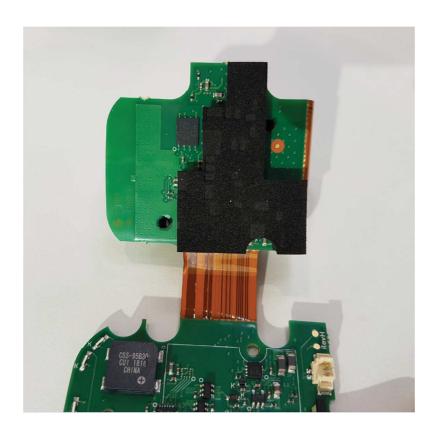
Underside view of flexible PCB of Radio Module removed from main housing
